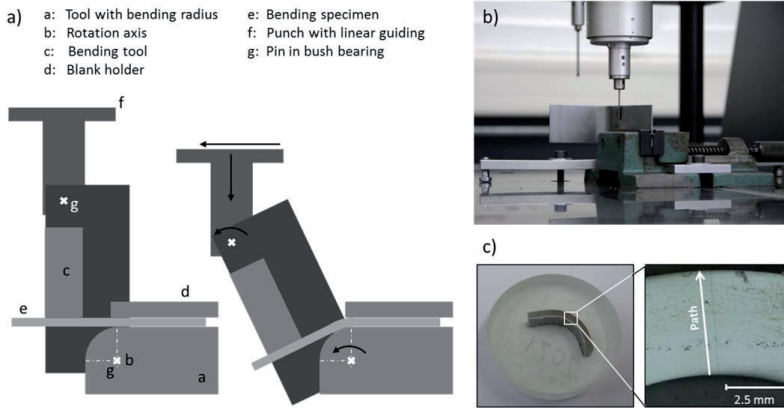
a) Schematic of folding tool, b) Measurement of bent specimen with coordinate measuring machine, c) Measurement of micro hardness in bending zone
